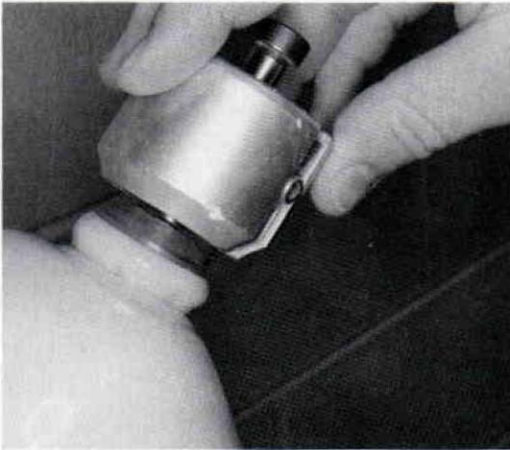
Trimming the excess Surlyn away from the end of the valve housing with the trimmer.
